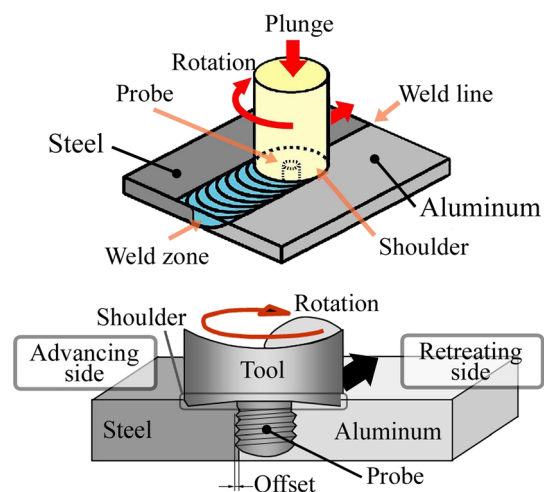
Diagrams of the dissimilar friction stir welding (FSW) process.
